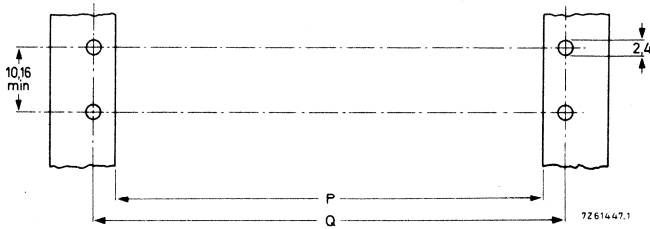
Hole pattern for rail mounting of male parts; see Table 4 for dimensions P and Q.
